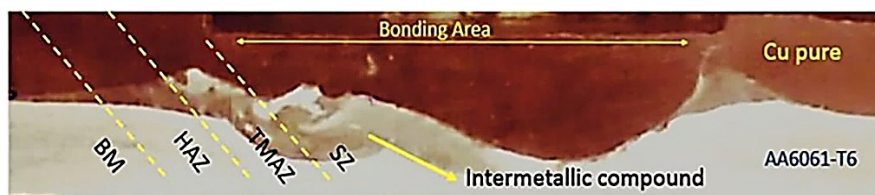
Macroscopic Show of the Weld Sample Cross-Section.
